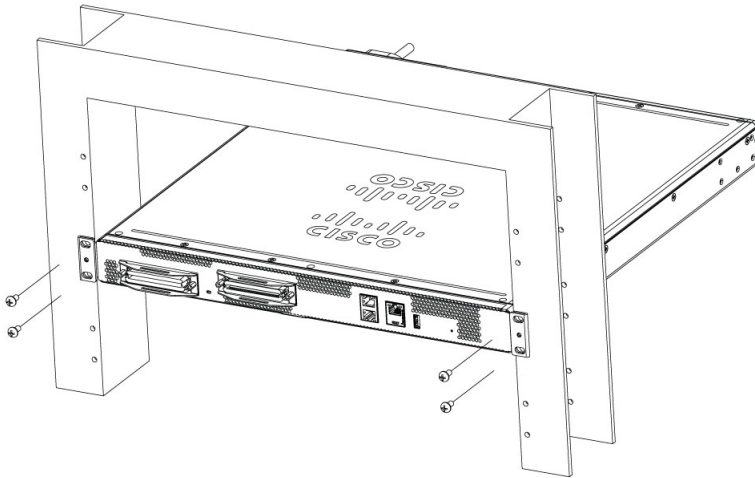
Mid mountingFigure 8: Power Socket Side Mounting
